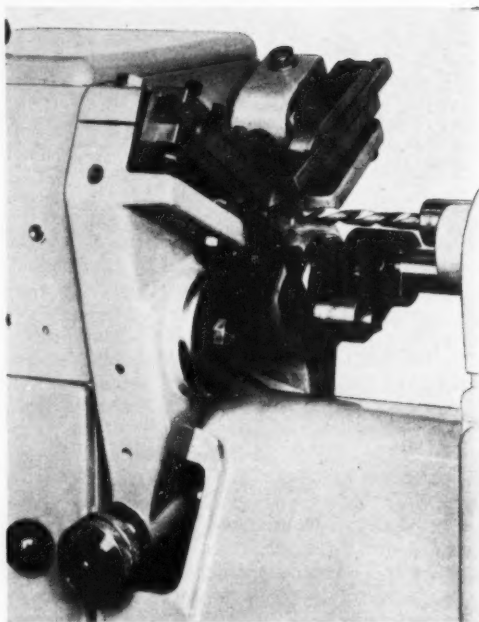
Close-up View of the Forming and Drilling Slides on the Simplomat Automatic Screw Machine Shown in Fig. 1
